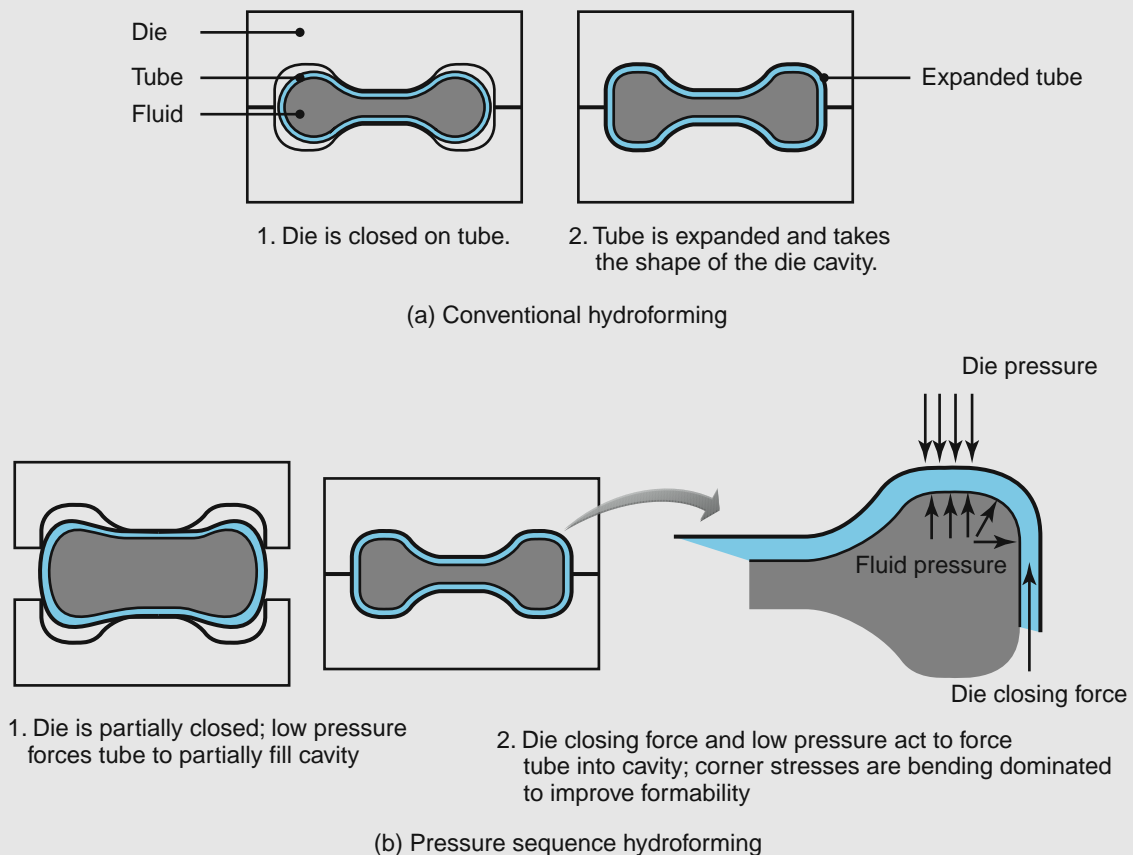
Schematic illustration of expansion of a tube to a desired cross section through (a) conventional hydroforming and (b) pressure sequence hydroforming.
